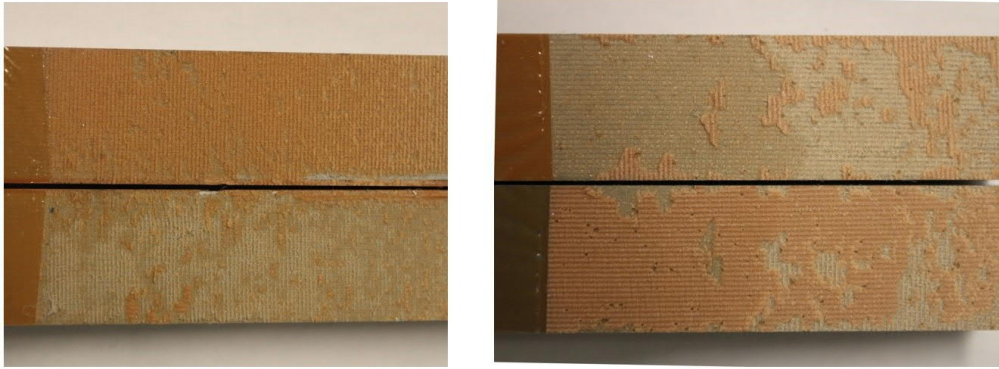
Fracture surface fractography of SLBa (left) and SLBb (right) specimens after testing.
